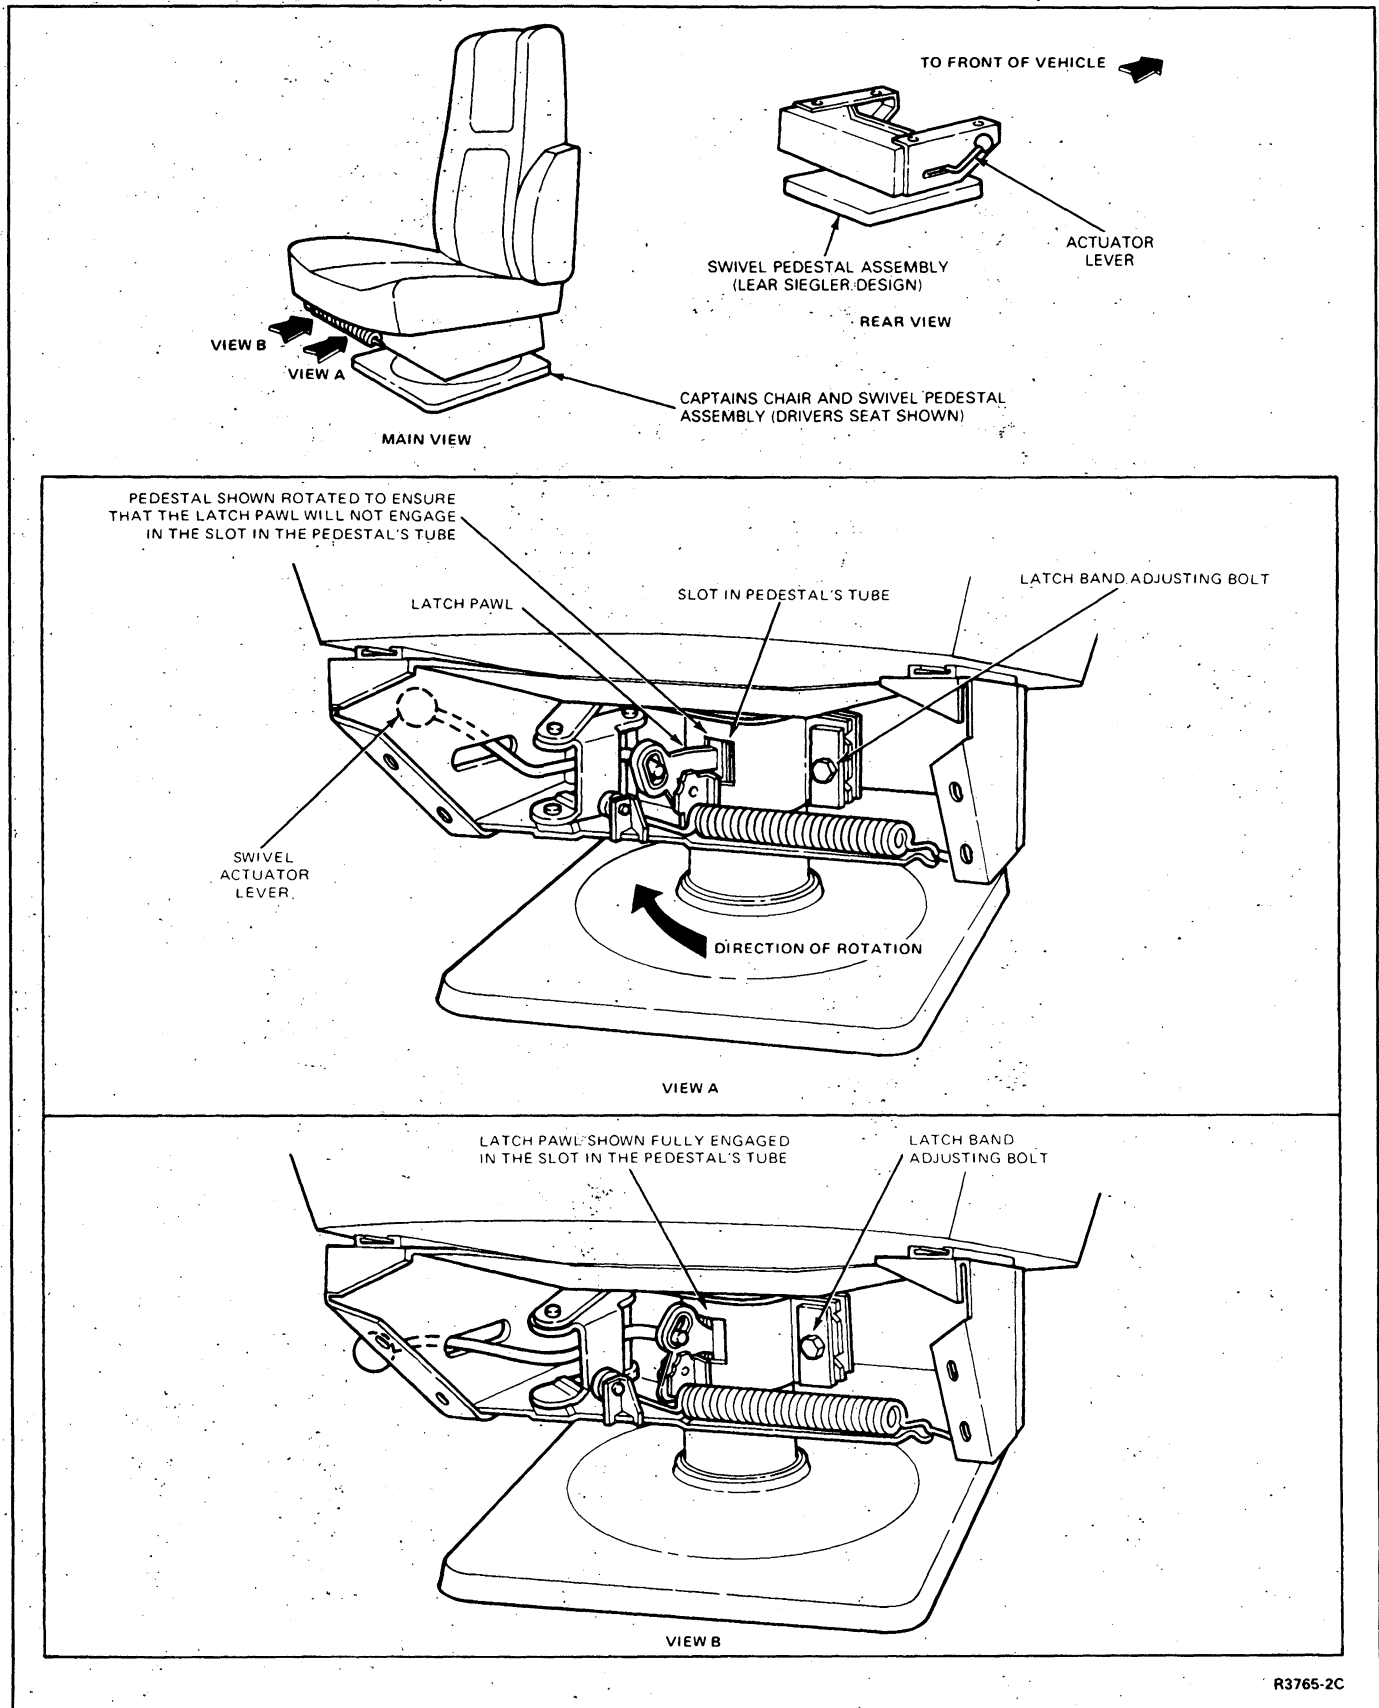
Swivel Pedestal Assembly Latch Band Adjustment—E-150—E-350 and Club Wagon
